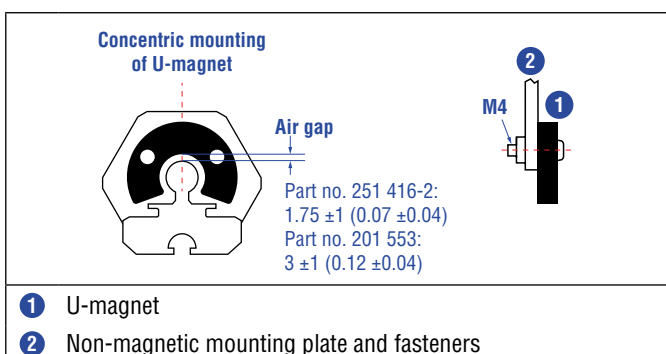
Mounting of U-magnet (part no. 251 416-2 or part no. 201 553)
